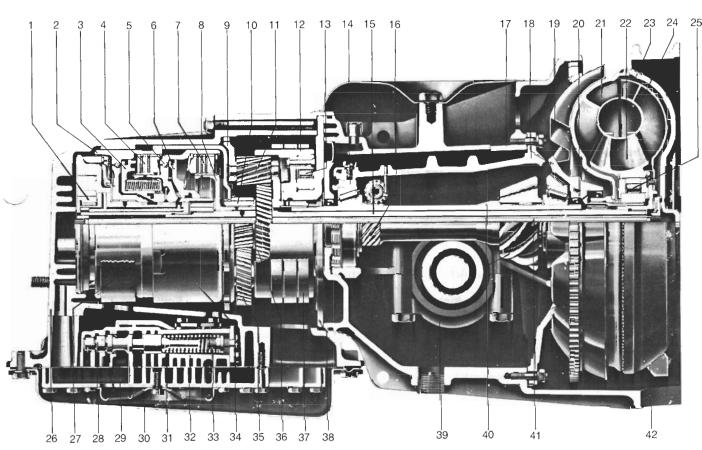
Cutaway view of automatic transmission. Final drive is different on vehicles covered by this Manual.
